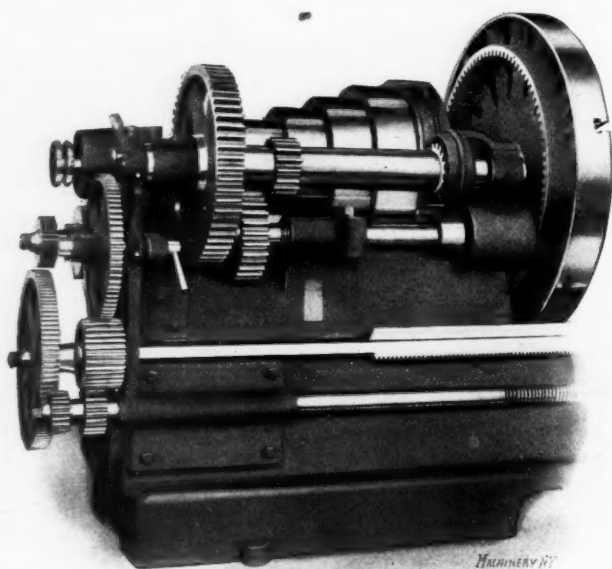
Driving and Feed Gearing of Fifield Lathe
